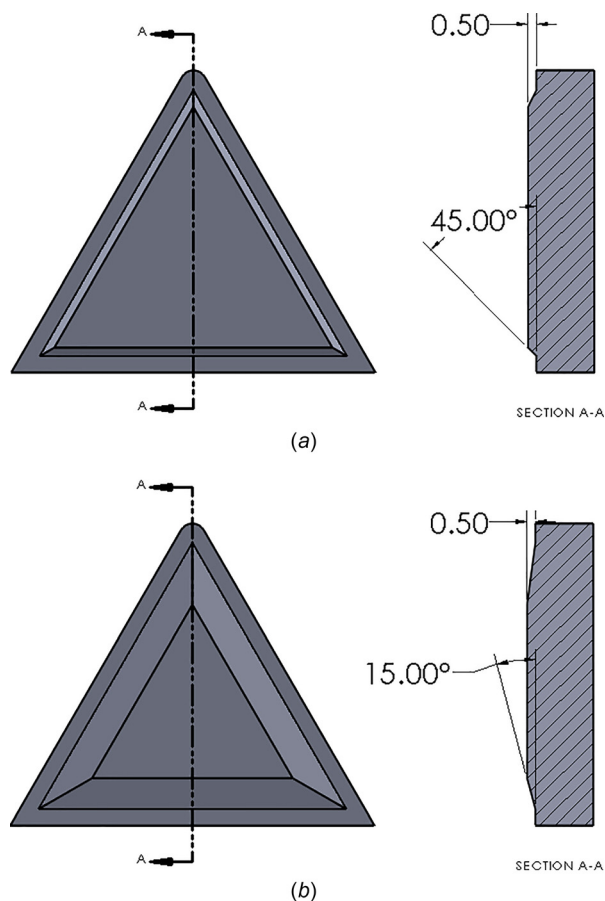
Grooved turning inserts with chip-breaker geometries: (a) grooved insert 1 and (b) grooved insert 2
